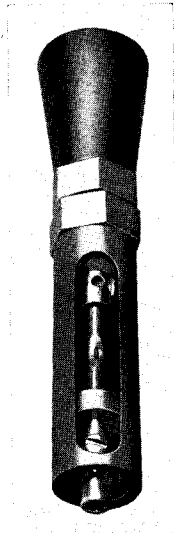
INTERNAL PROTECTIVE LINK WITH SECTION CUTAWAY TO SHOW WORKING PARTS
